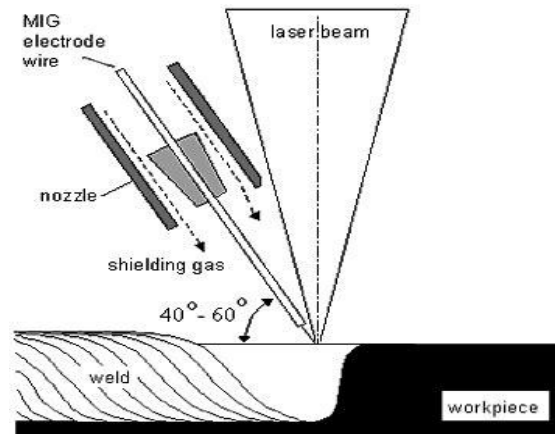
Hybrid Laser Arc Welding (HLAW) (TWI, 2018 b)
